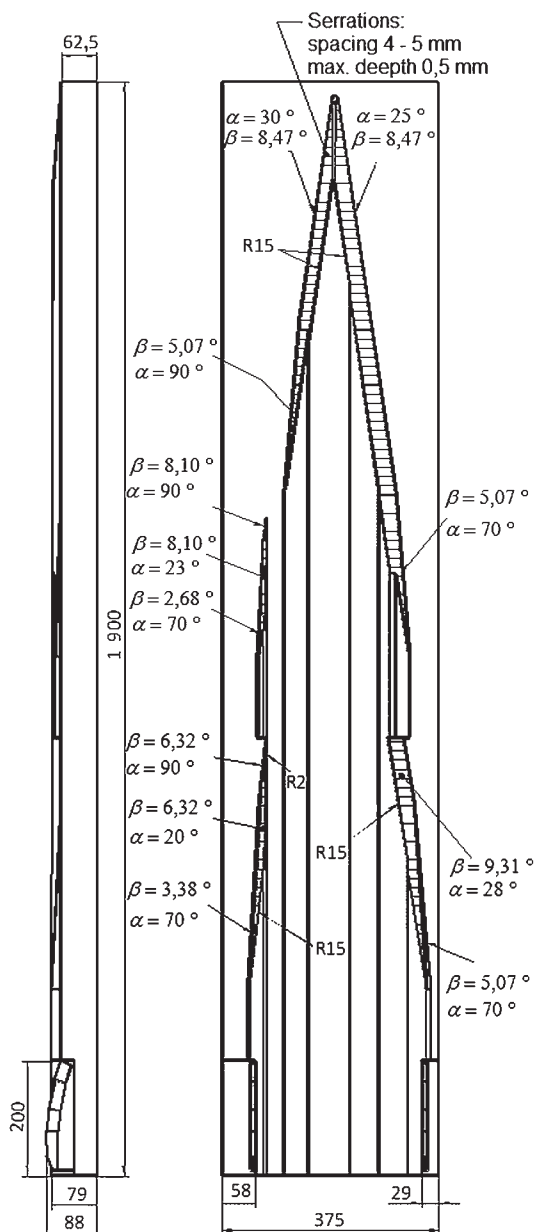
Developed view of the wedge tool used to roll a stepped shaft; linear dimensions are given in mm, while angular dimensions are given in degrees
